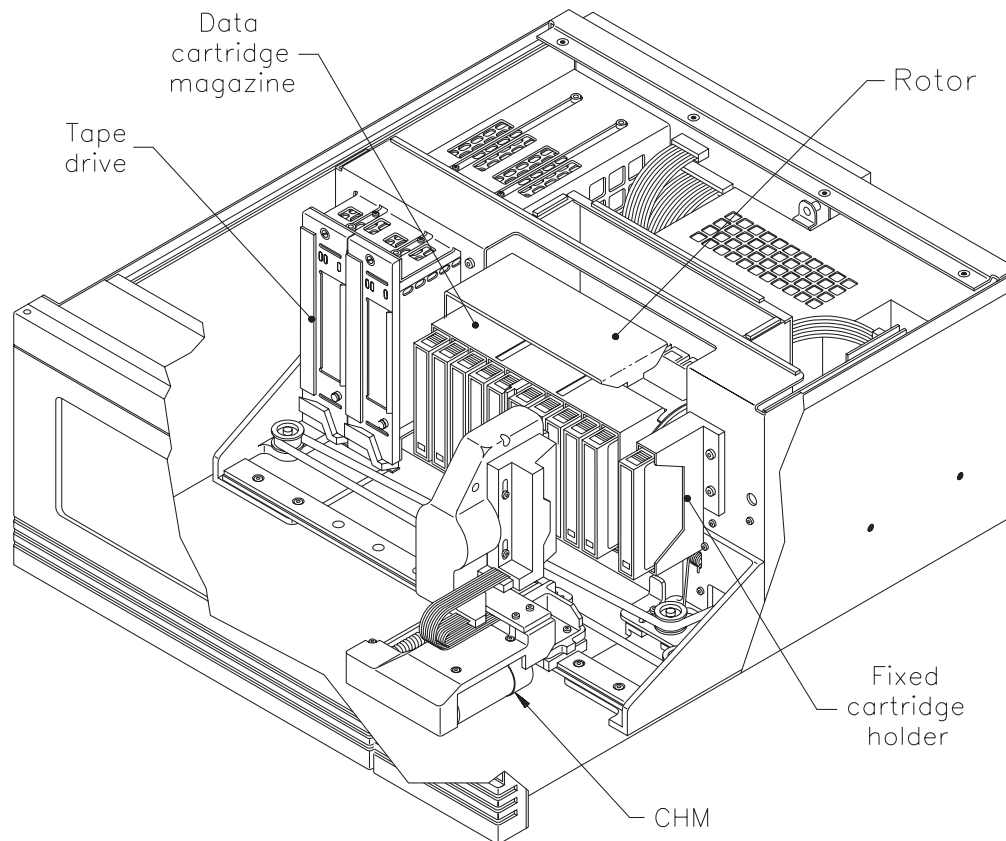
EXB-220 with cover removed (rack-mount version shown)
